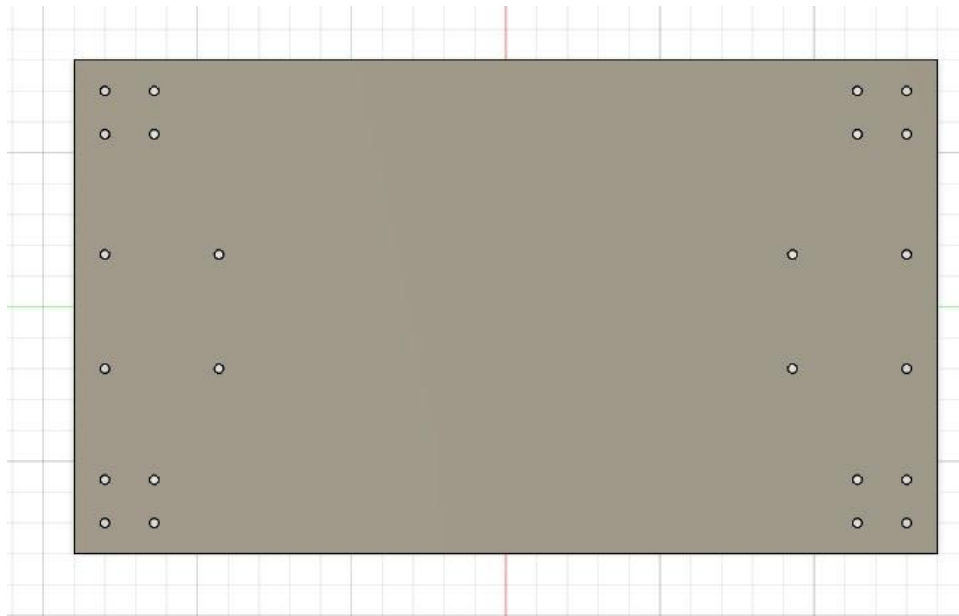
The Flat Chassis Design withoutt the Carrier Board Magnet Holes
